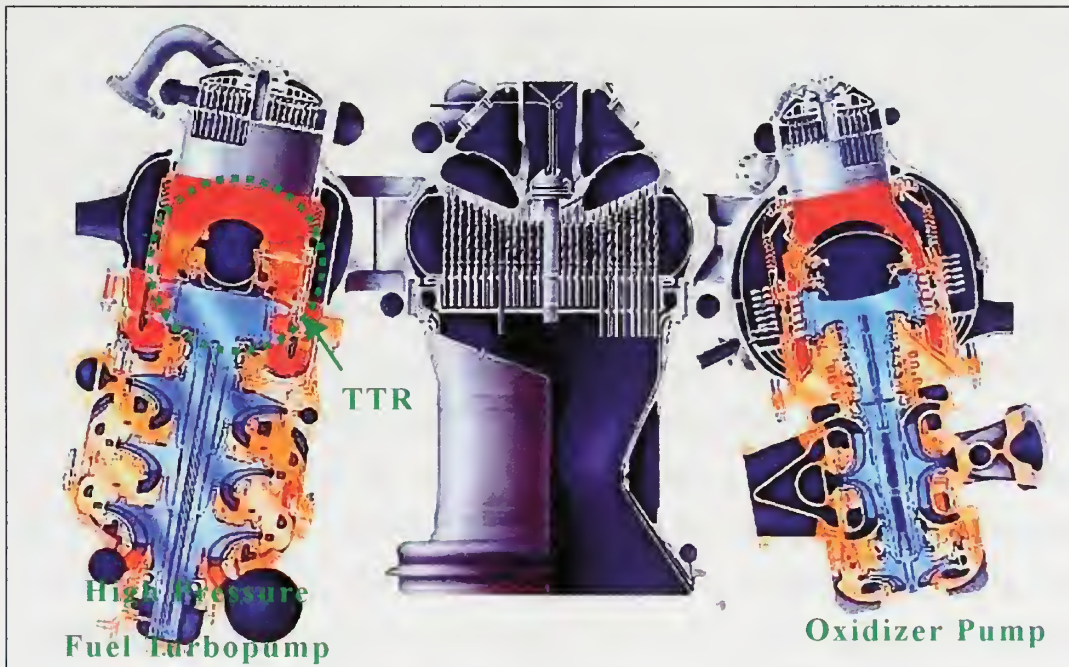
Space Shuttle Main Engine Cutaway [Ref. 1]
